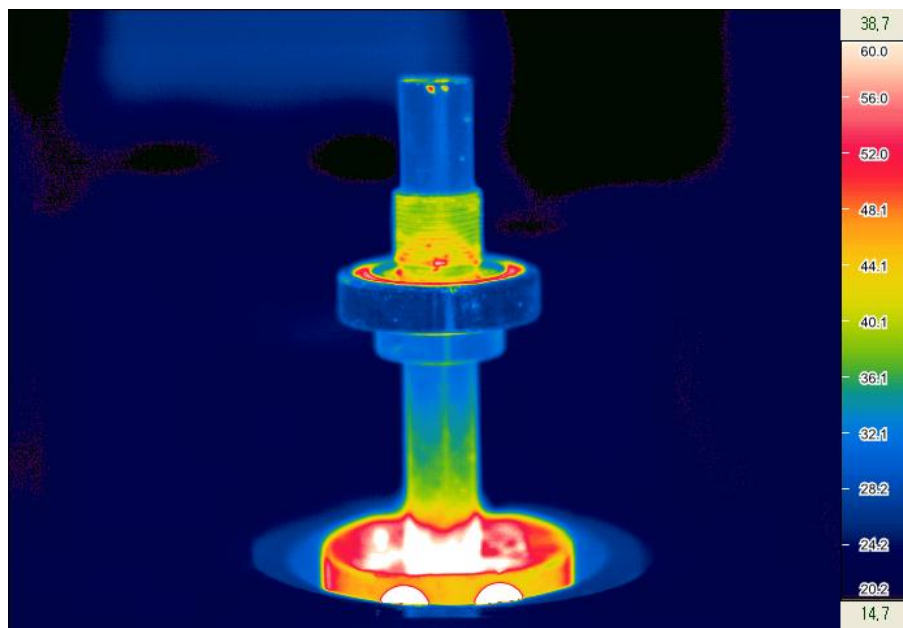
Radial view of the spindle acquired using the infrared camera.
